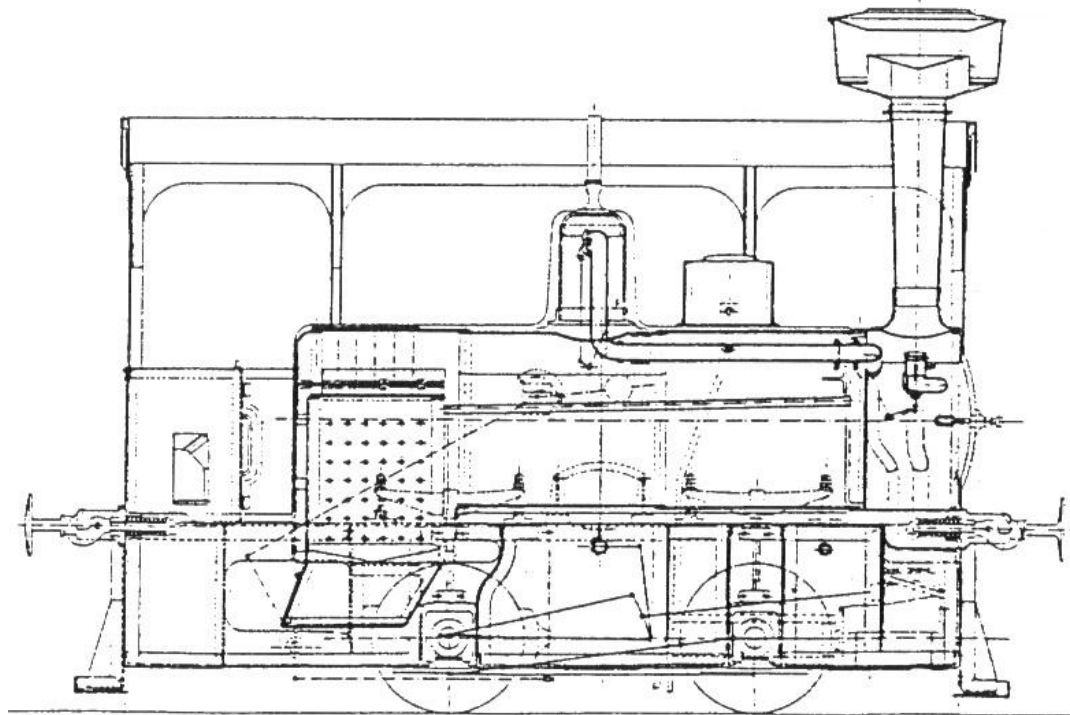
Steam locomotive, Krauss brand & Comp. Overall drawing
